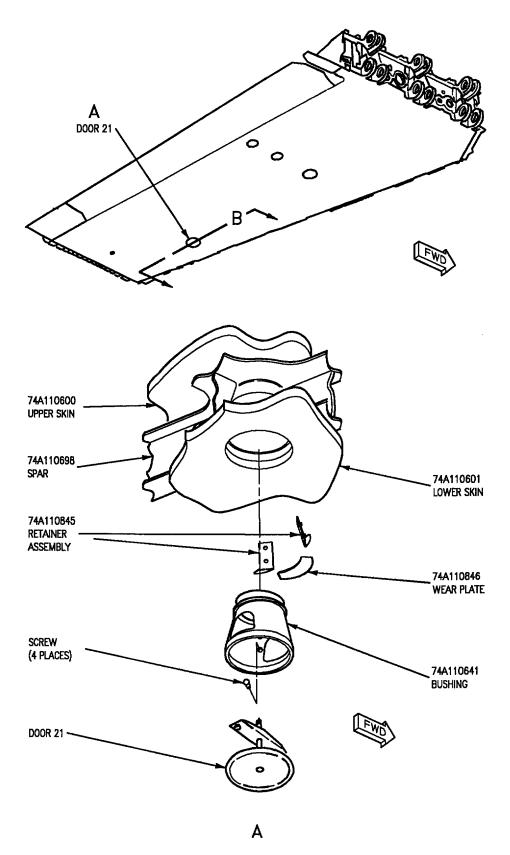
Outboard Pylon Bushing Alignment (Sheet 1)
